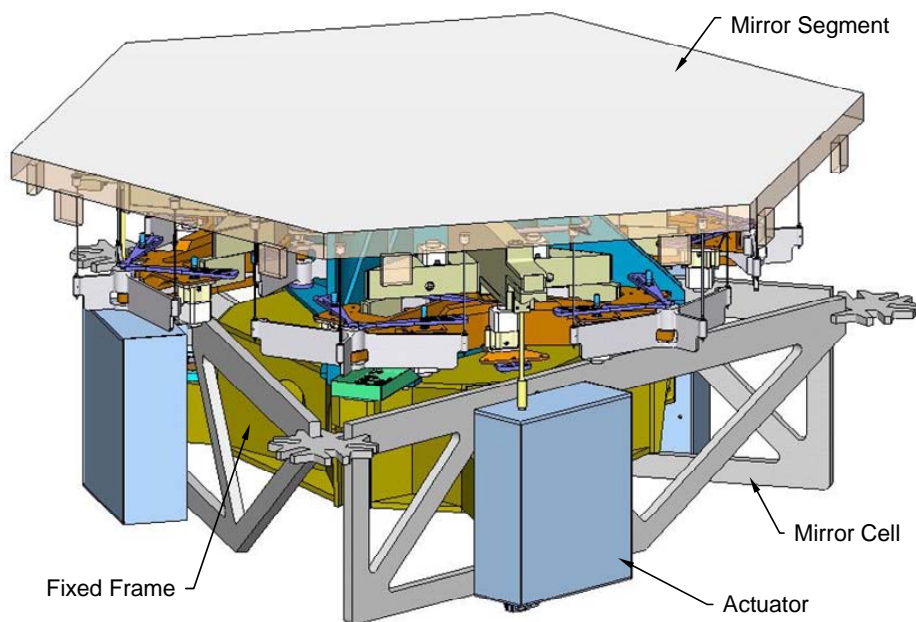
Primary Segment Assembly (PSA) mounted to Mirror Cell with Actuators
